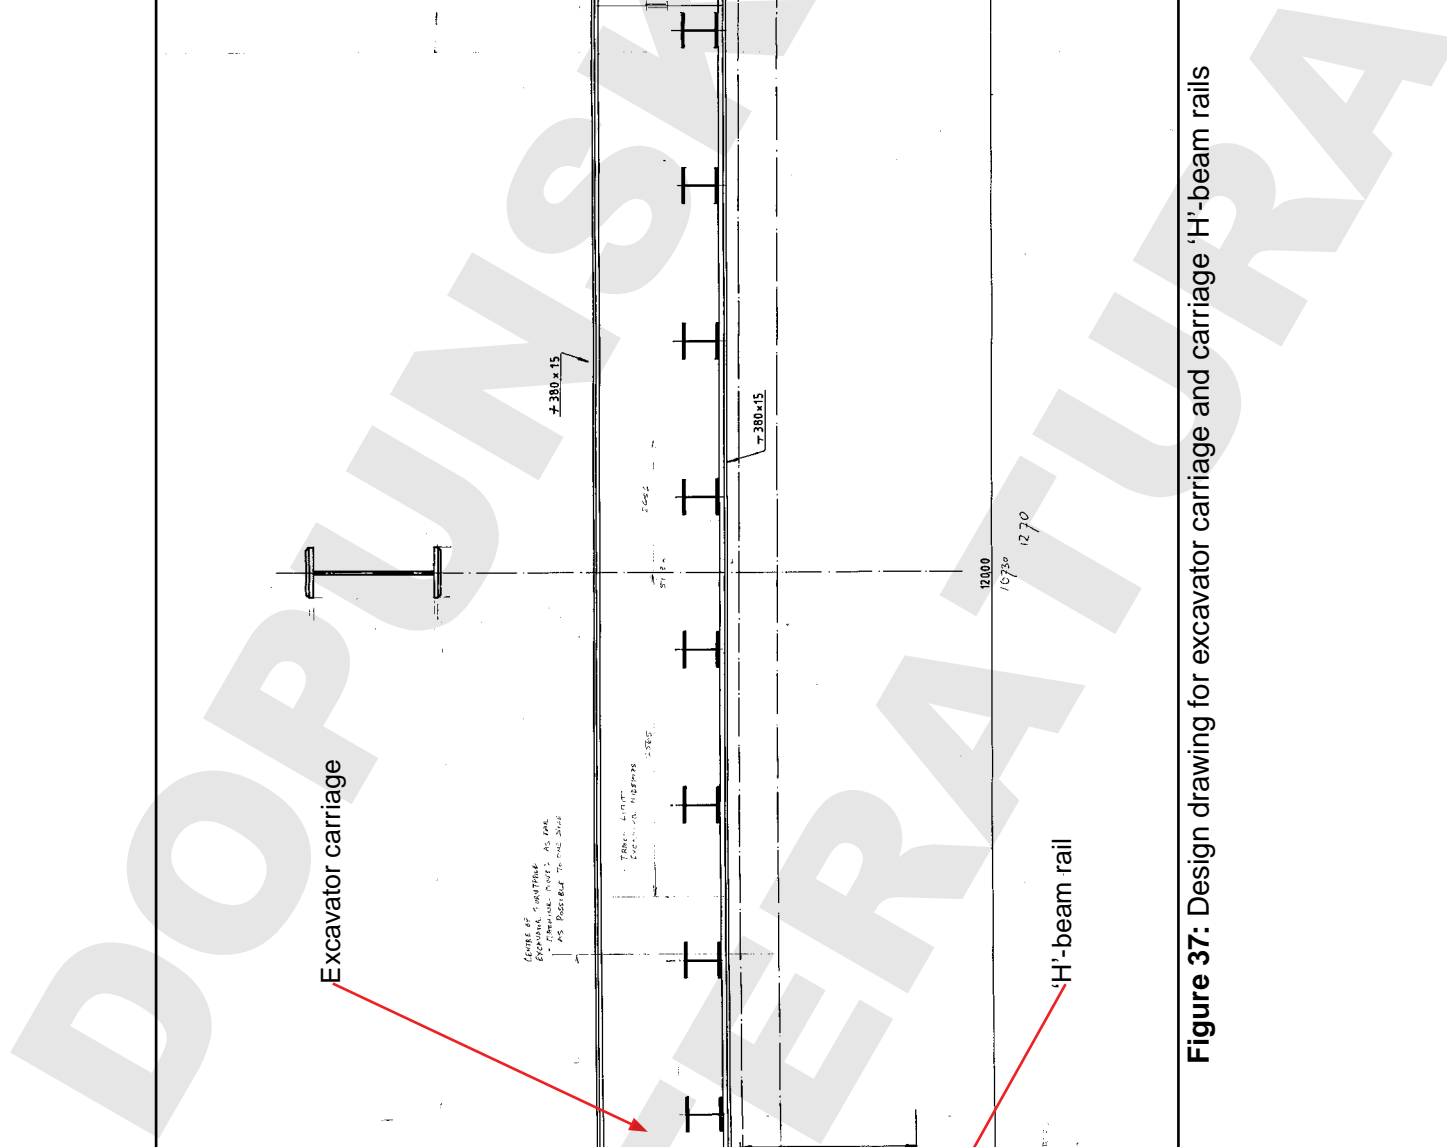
Design drawing for excavator carriage and carriage 'H'-beam rails
